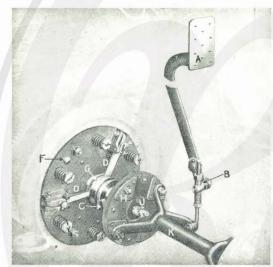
The Clutch of the 14 H.P. "Standard" Mounted ON THE FLYWHEEL.
